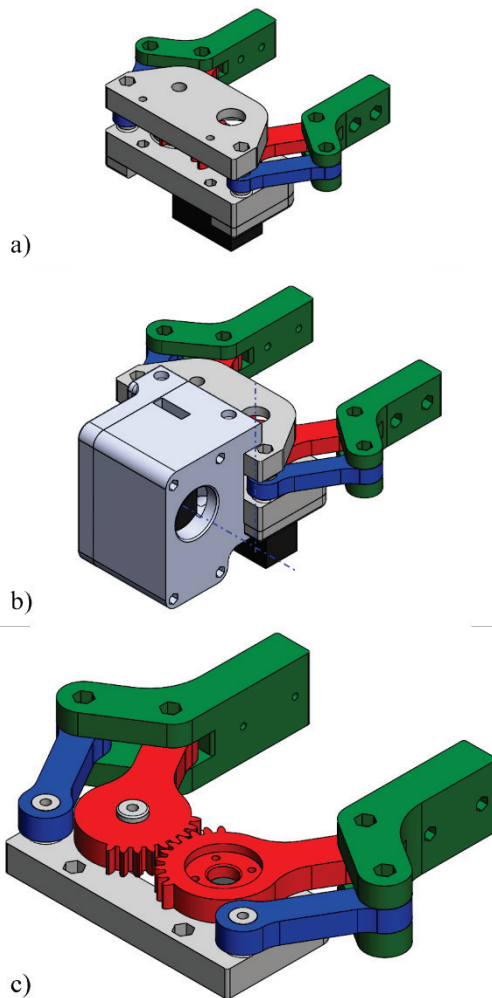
3D models of a parallel gripper mechanism parametric design: (a) Link length $l = 24$ mm with FS90MG motor, (b) Link length $l = 28$ mm with FT1117M motor and rotational DoF, (c) Link length $l = 40$ mm with FS5115M motor
